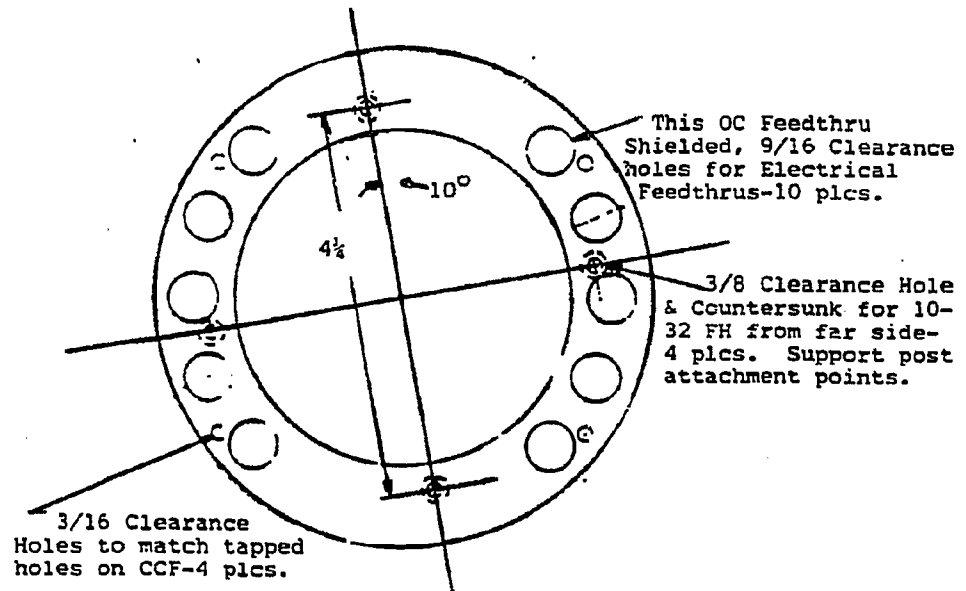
The aluminum attachment plate for the support posts is also the attachment point for the OC shielding (see Photograph A.49).
